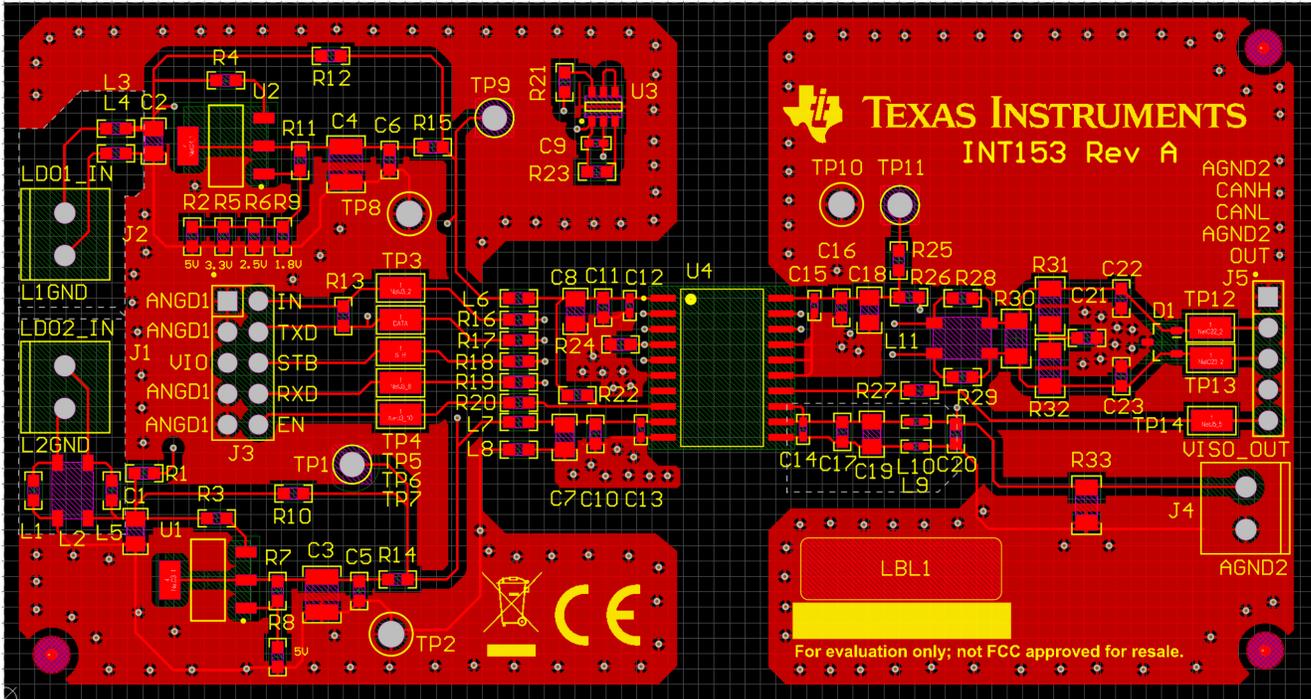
ISOW1044DFMEVM PCB Layout - Top Layer
